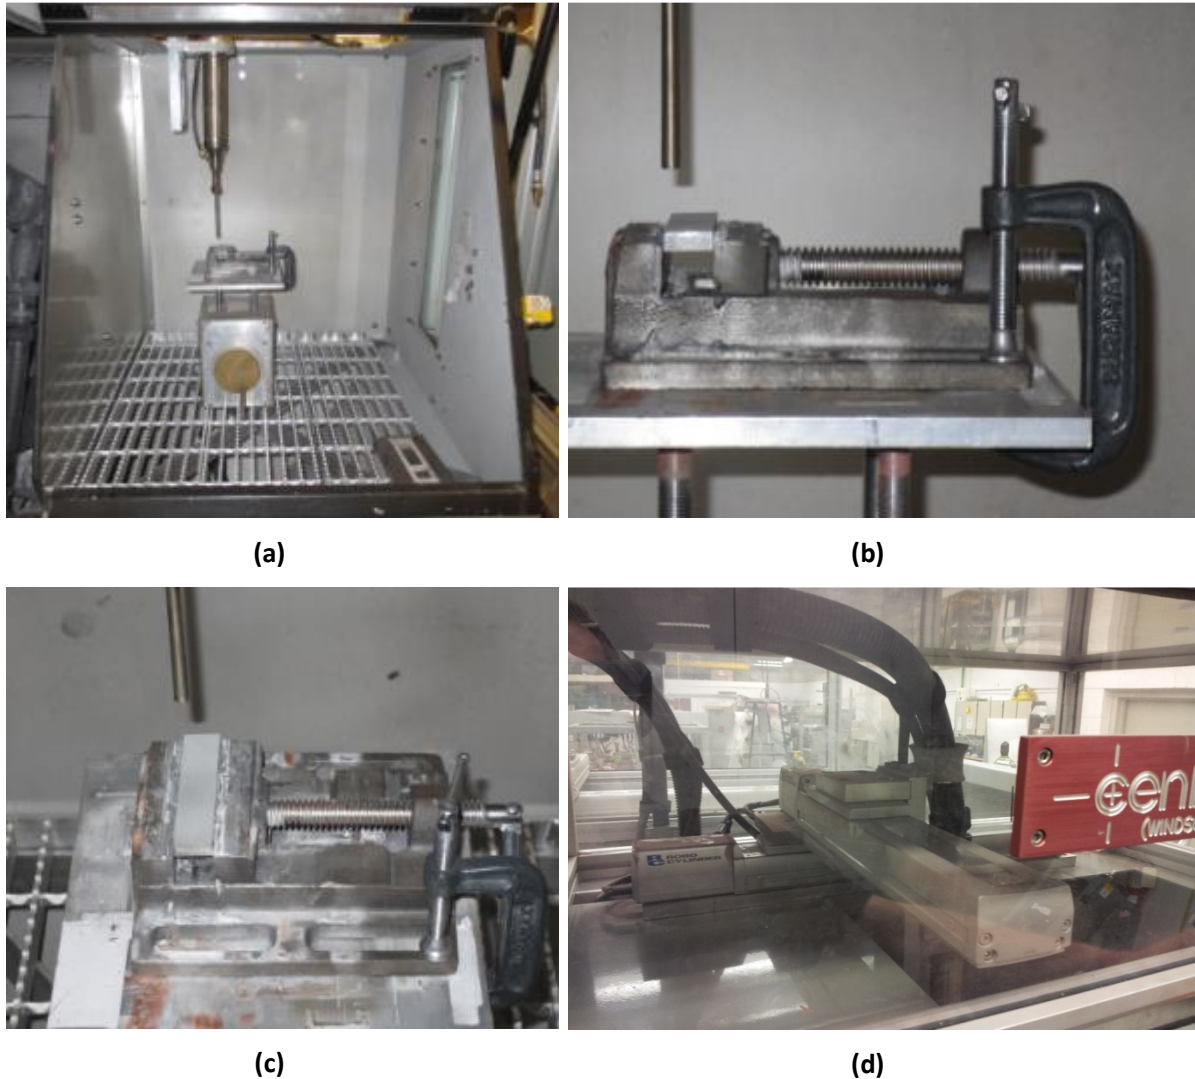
Substrate Setup, Ready to Spray. Substrate is Mounted onto a Vise Secured to a Jack with a C-Clamp. (a) General Layout, (b) Side Close-Up, (c) Top Close-Up (d) Programmable X-Y Robot on Top of Cabinet
